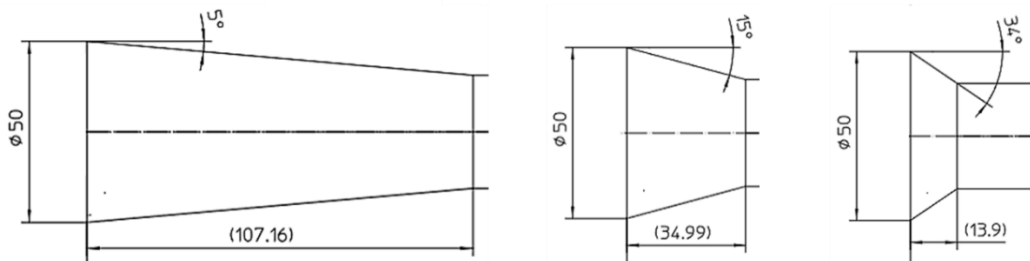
CAD drawings of the different boat tail geometries: 5° (left), 15° (center) and 34° (right) boat tails.
